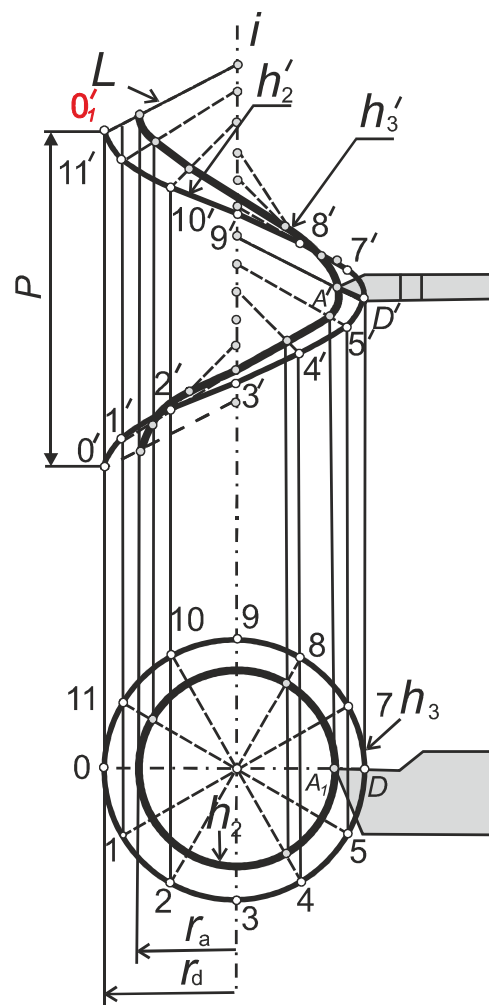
Scheme of execution of an oblique closed helicoid using a lathe cutter.
